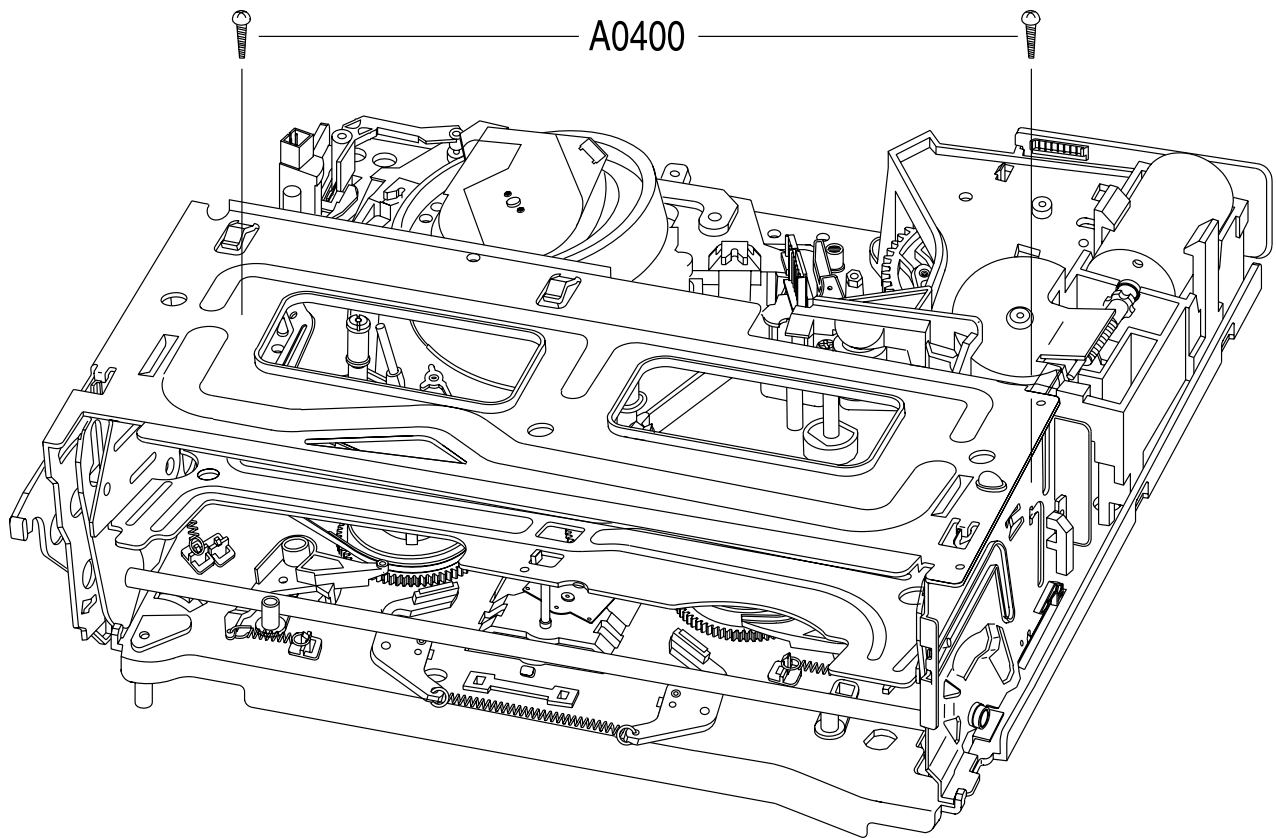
FRONT LOADING ASS'Y SEPARATION
